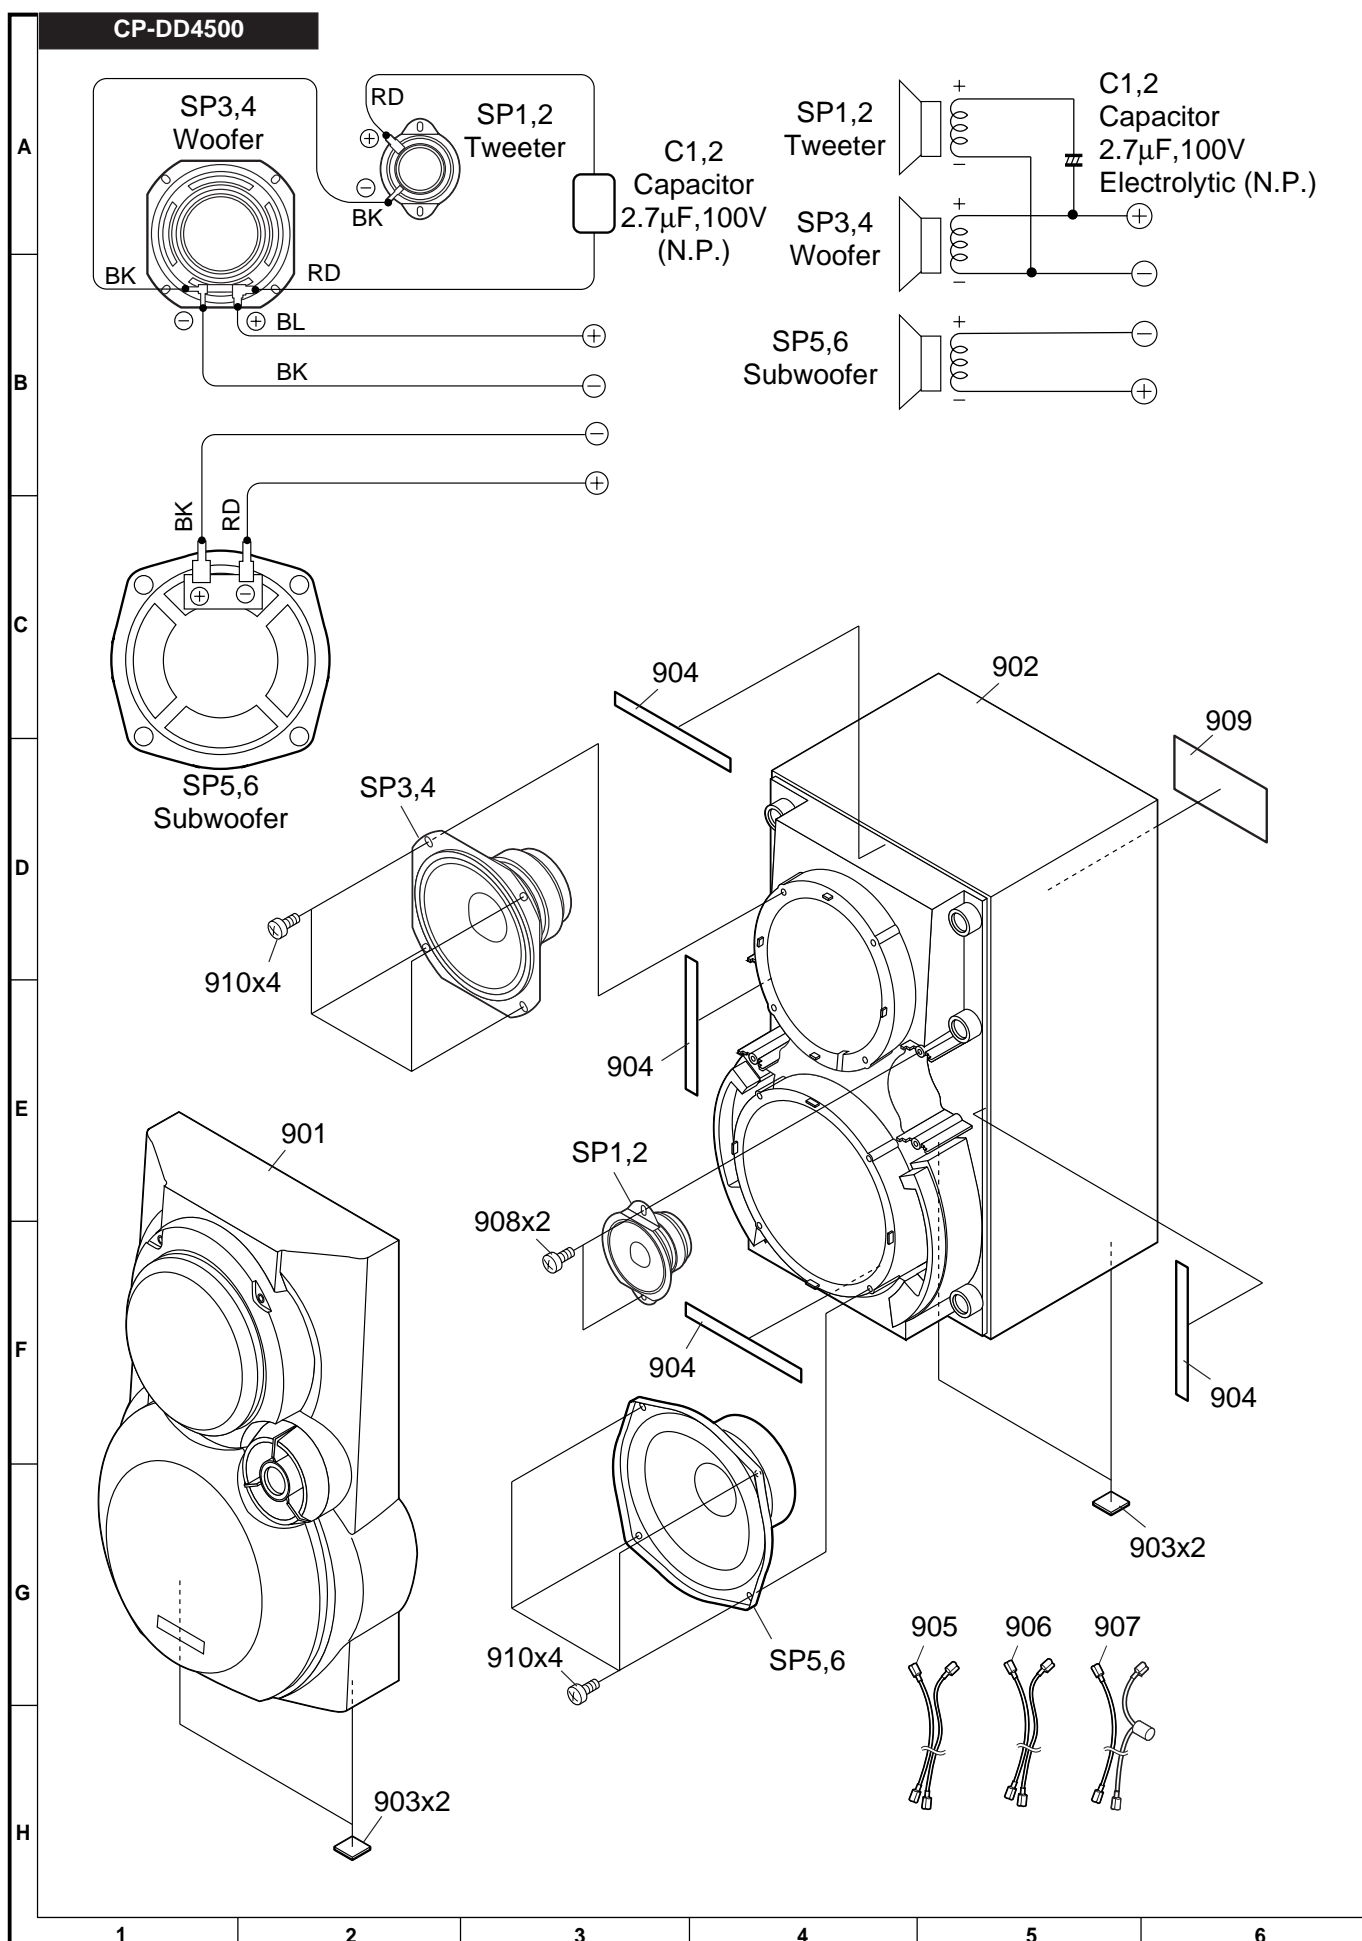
SPEAKER EXPLODED VIEW (1/3)
